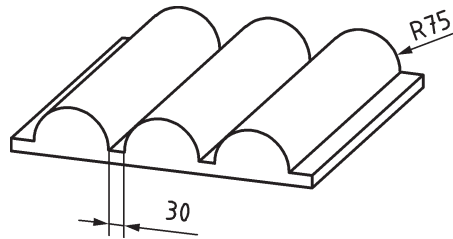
Crush plate with dimensions of 600 mm × 600 mm or smaller
